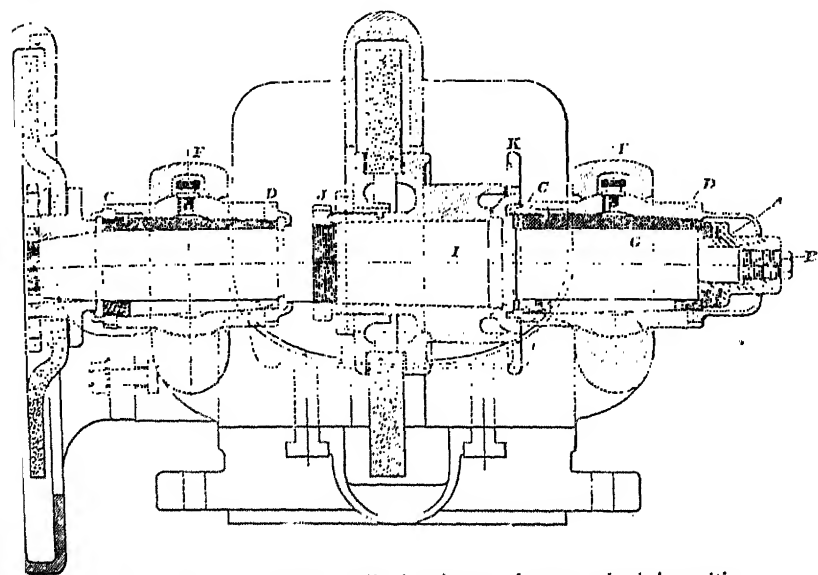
Section showing spindle, bearings, and emery wheels in position.
